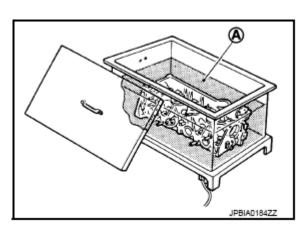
Heating Cylinder Head To 110 To 130°C Courtesy of NISSAN NORTH AMERICA, INC.
